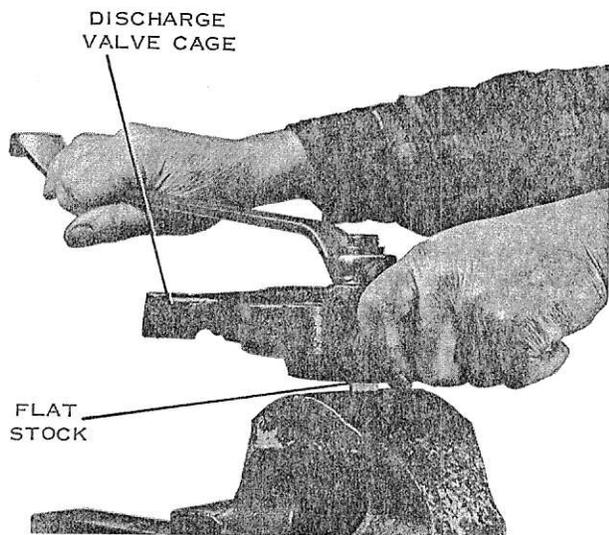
Alternate Method Of Disassembling Discharge Valve Cage
